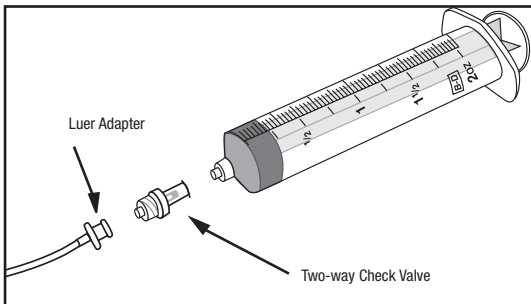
Luer lock, two-way check valve and syringe assembly.
